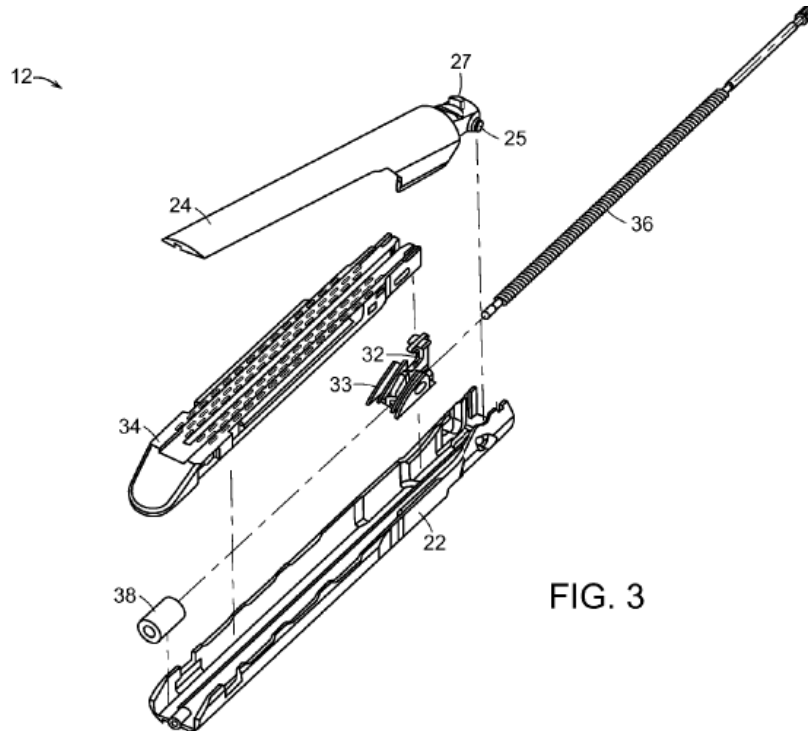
is an exploded view of end effector 12. *Id.* at 4:22. End effector 12 includes channel 22, anvil 24, cutting instrument 32, sled 33, staple cartridge 34 that is removably seated in channel 22, and helical screw shaft 36. *Id.* at 4:24–27. Cutting instrument 32 may be, for example, a knife. *Id.* at 4:28.
